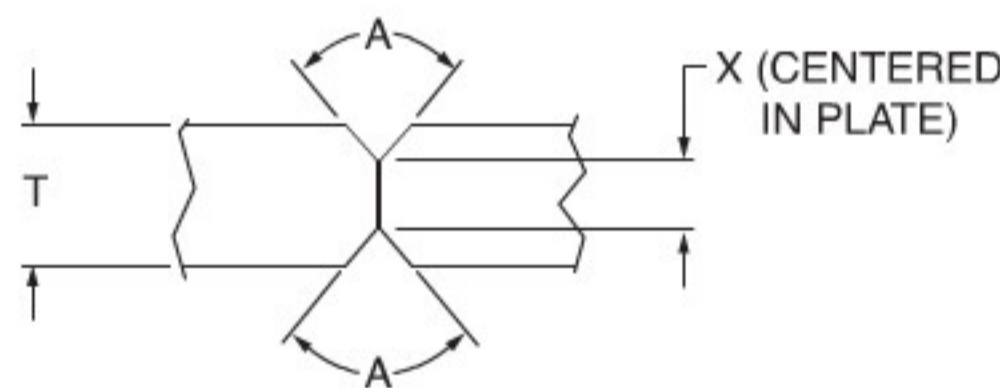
Multiple Pass Groove Weld Test Assembly
